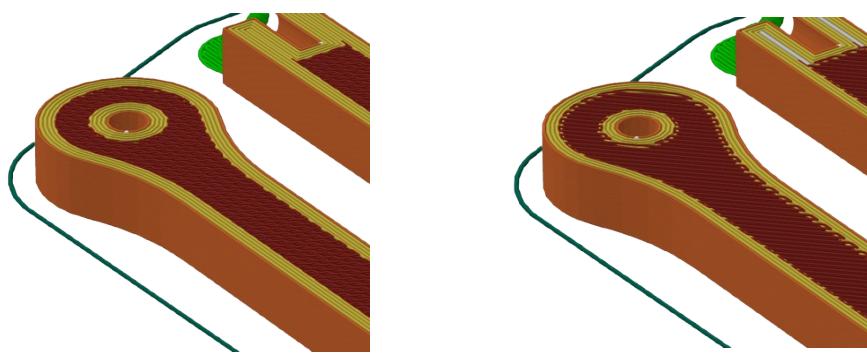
Left: Alternate extra wall disabled. Right: Alternate extra wall enabled.
